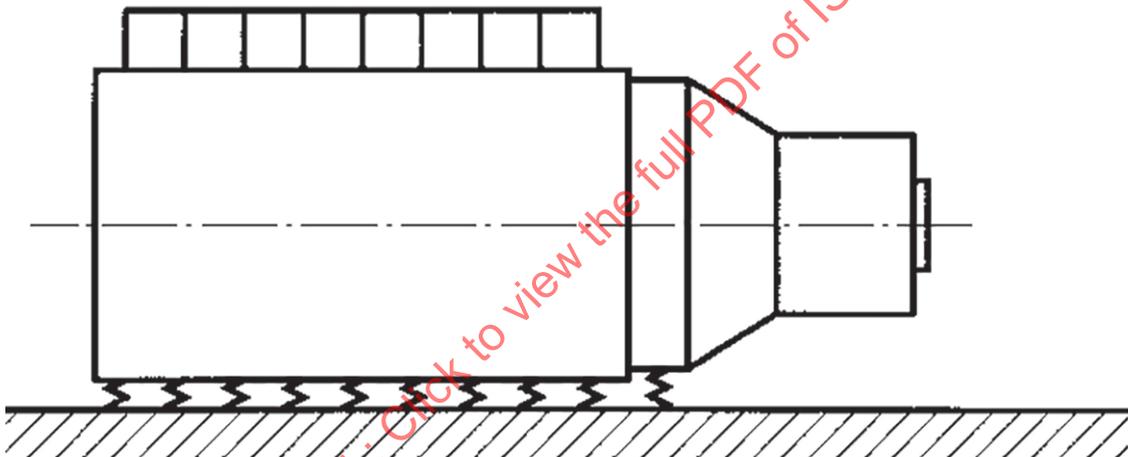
Assembly with flange housing and resilient mounting of the engine
